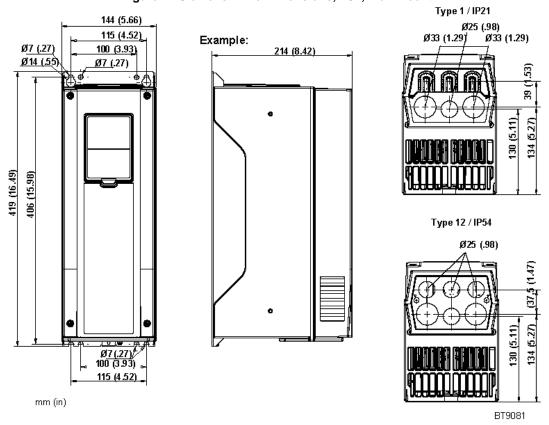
Siemens Drive Dimensions, FS5, Wall-Mount.
